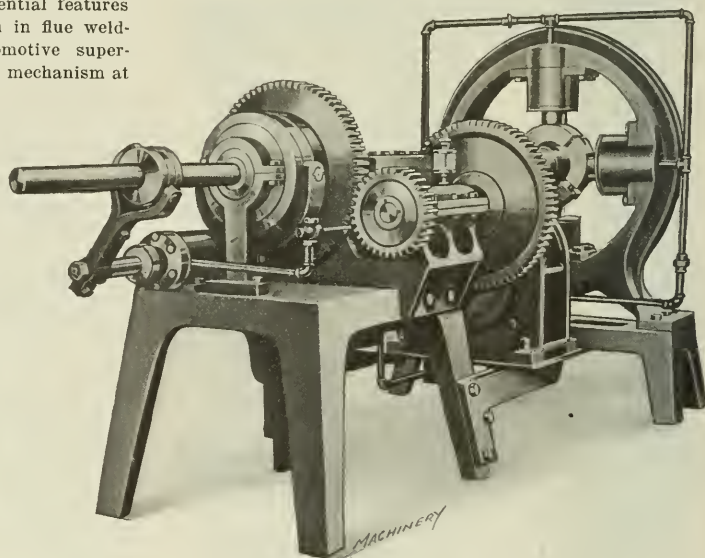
Three-quarter View of Southwark Flue Welder from Opposite End, showing Driving Mechanism
